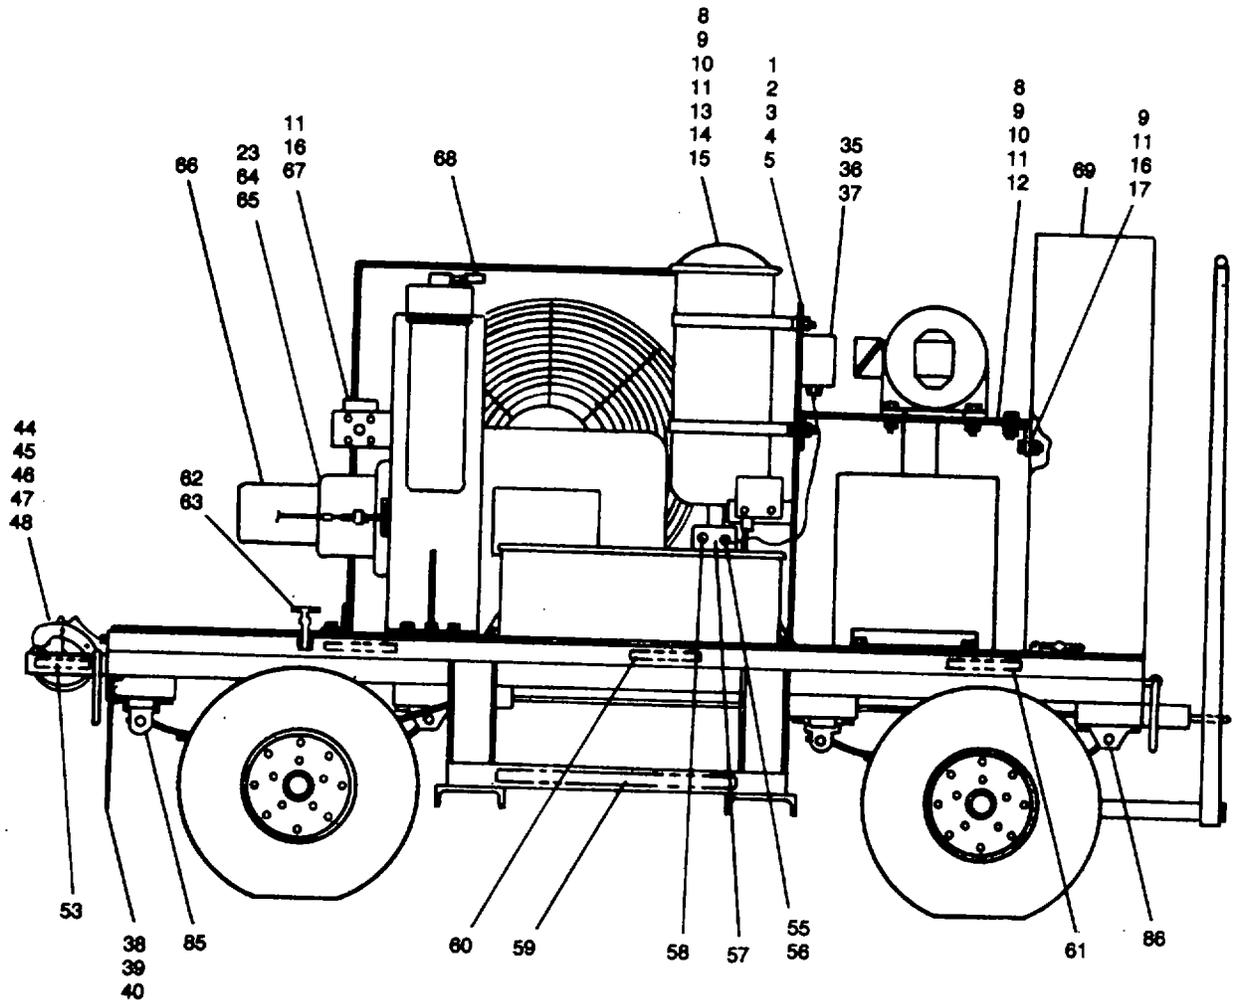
INTERNAL COMPONENTS ASSEMBLY
